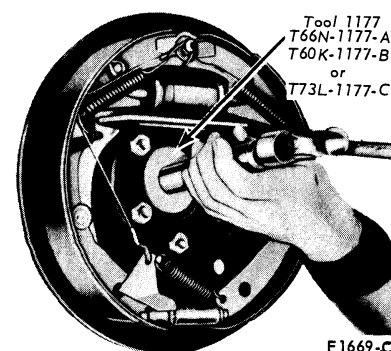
Installing Rear Wheel Bearing Oil Seal
